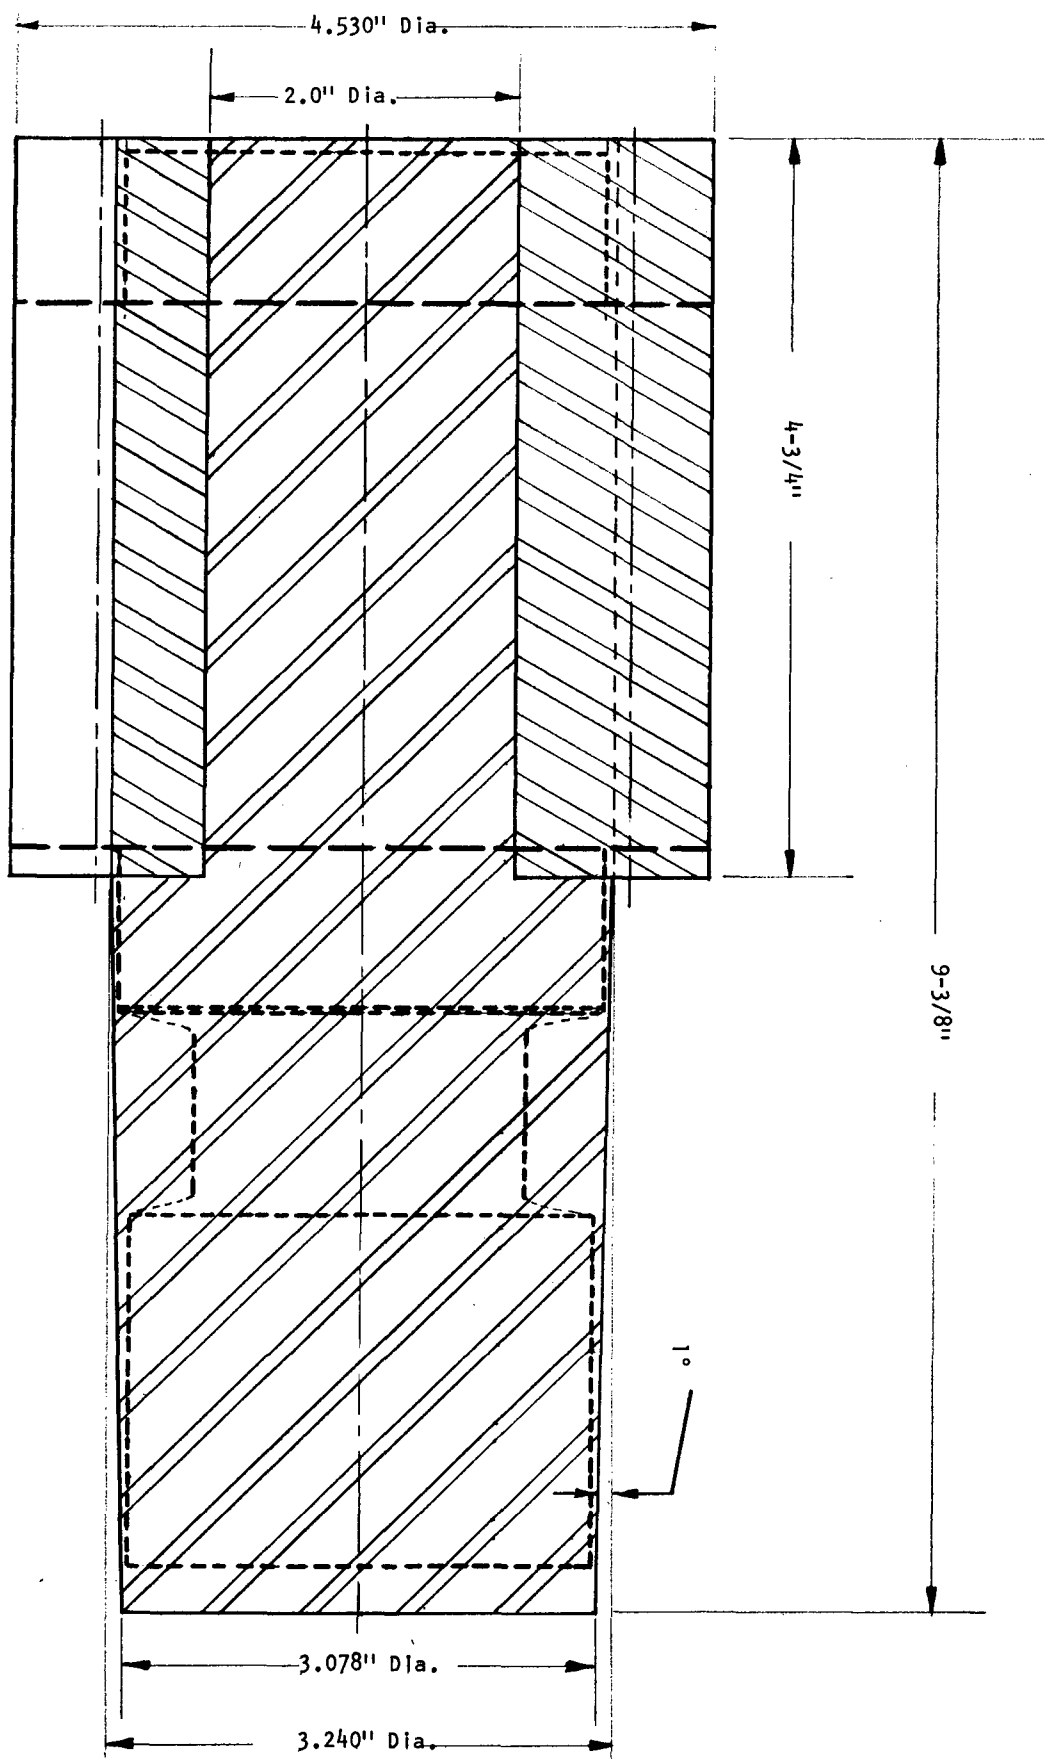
Relationship Between the Forged Shape and Machined Shape Of the Final Drive Pinion Gear.
